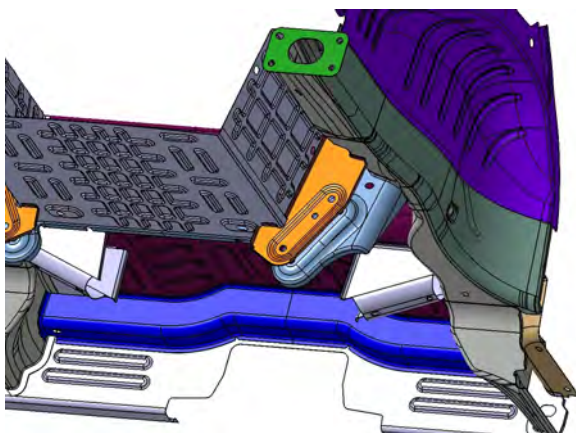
Rear rail inner (flushed with wheel house inner)
